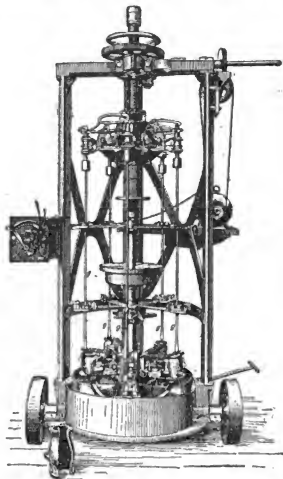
Owens's Glass-blowing Machine. g.g.g. Blowing-irons.
